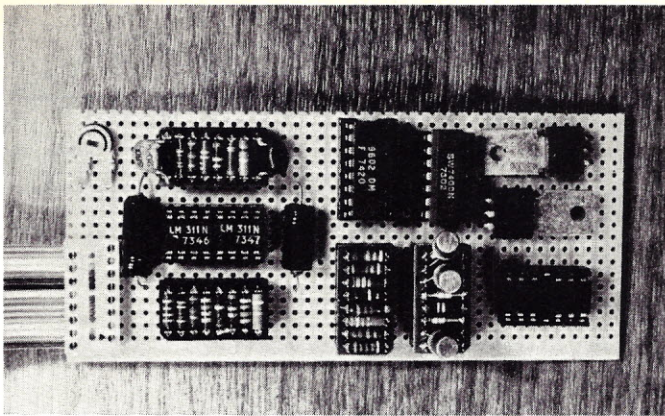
Internal components plug into IC sockets with wire-wrap pins. Resistors, diodes and the three small transistors are installed on plug-in socket adapters. One socket serves as a connector for a DIP plug with a ribbon cable wired to the front and rear panel-mounted components.
